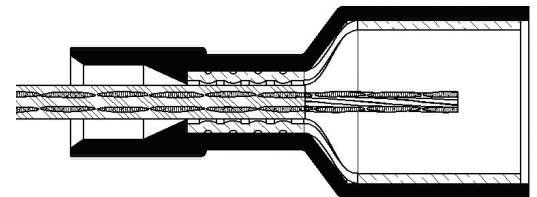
Cross Section View of Standard Female Disconnect with Thin Insulated Wire Inserted in Crimp Barrel
